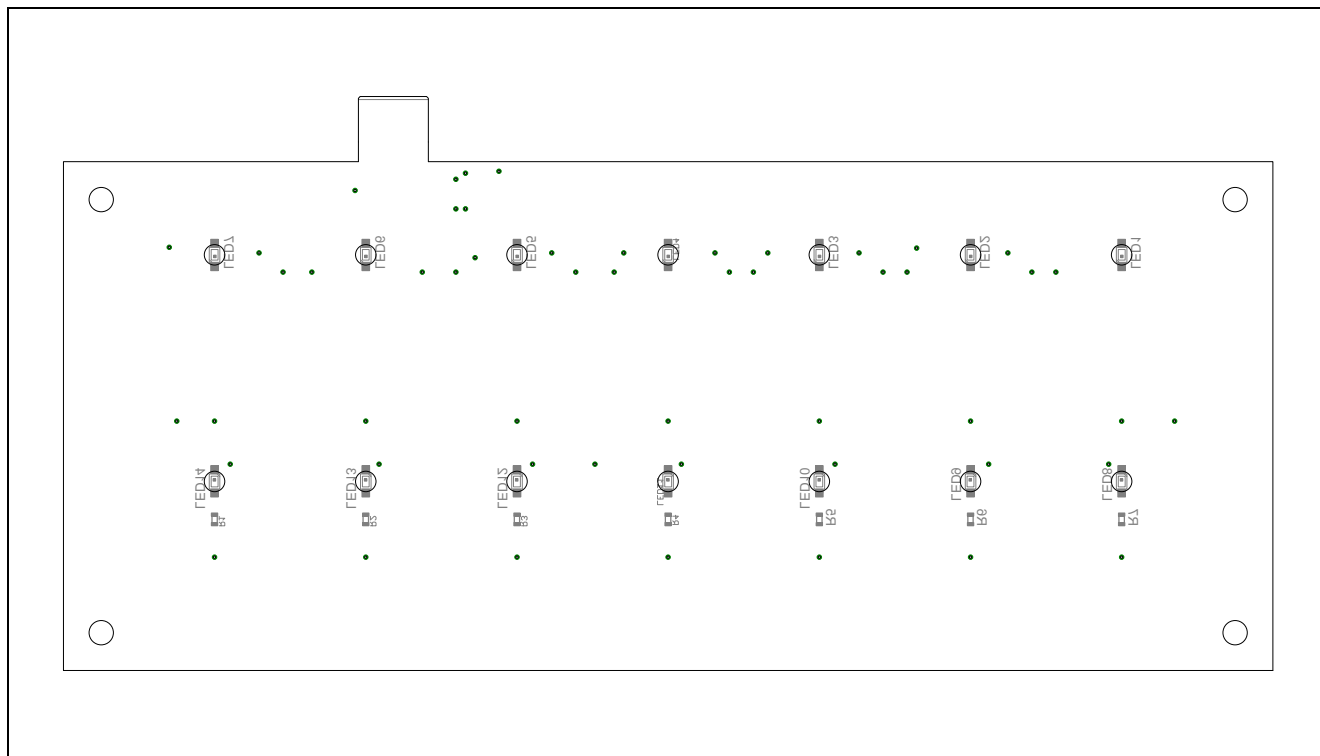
inTouch Buttons* Board Component Bottom Layout
